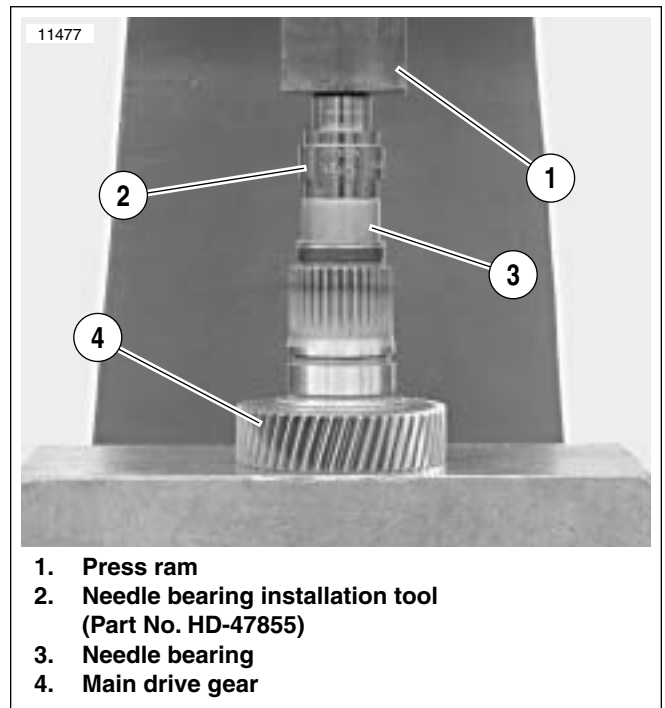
Pressing Outer Needle Bearing Assembly into Main Drive Gear
